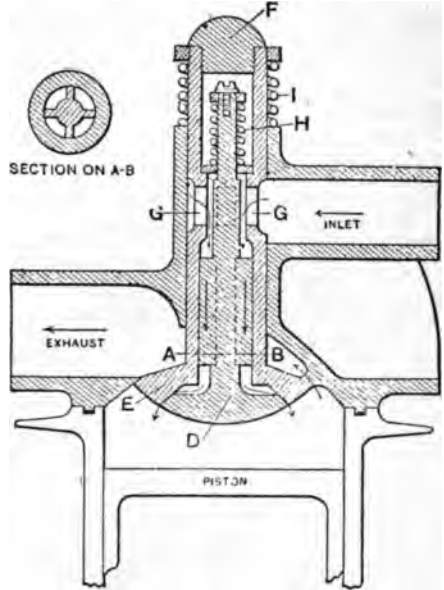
D'equlevilly Combined Inlet and Exhaust Valve
